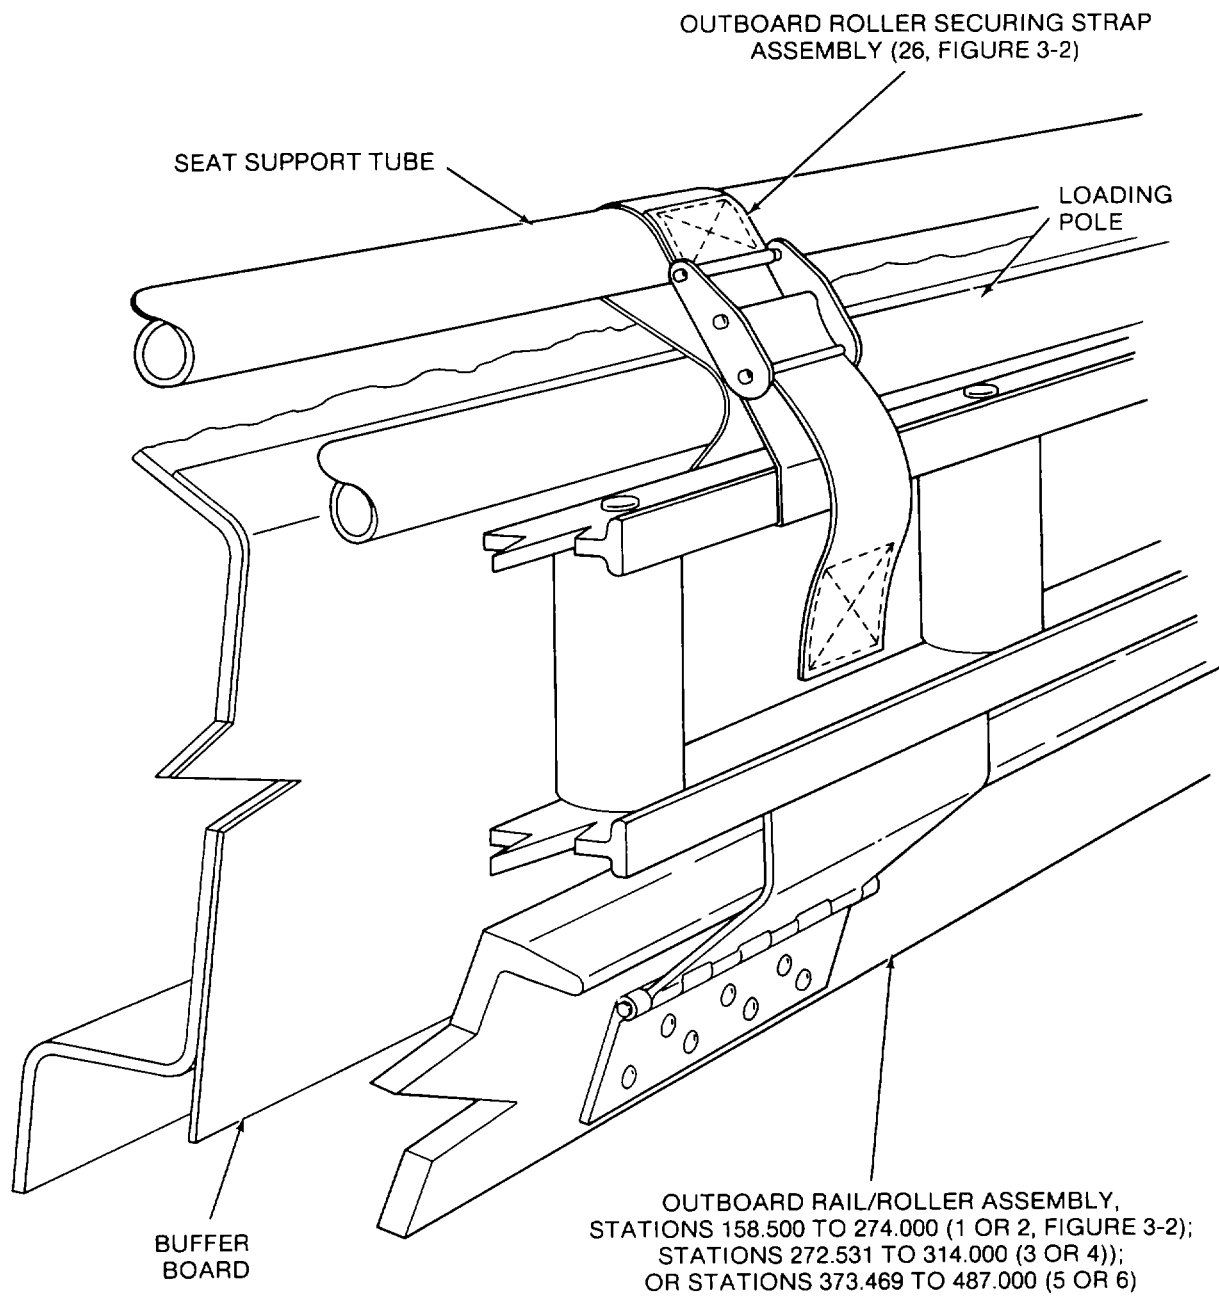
Seat Support Tube Outboard Rail/Roller Assembly Aircraft Loading Pole Stowage
